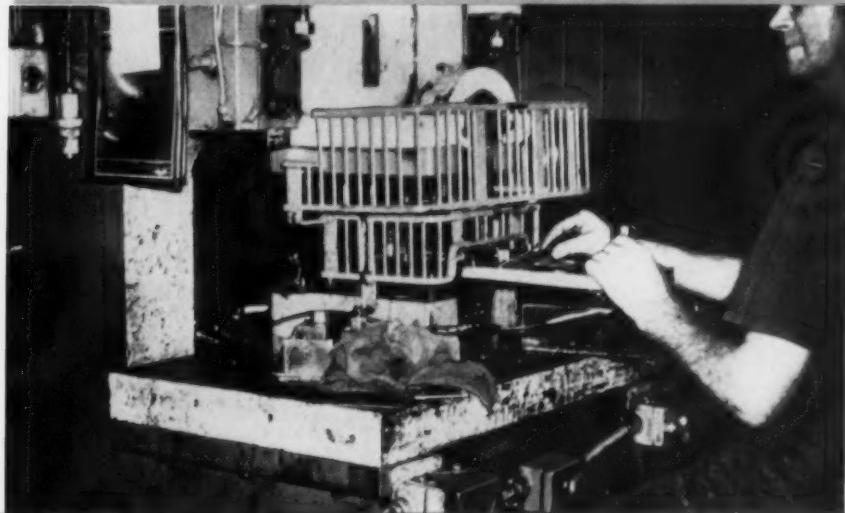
Shuttle feed design with air ejection which permits full die enclosure and allows one button control, thus leaving one hand of the operator free to ready the next workpiece.
